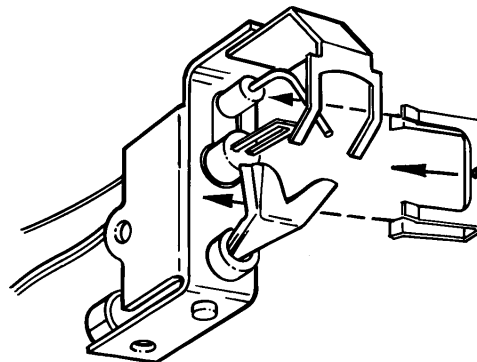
IGNITOR AND FLAME SENSOR ASSEMBLY
